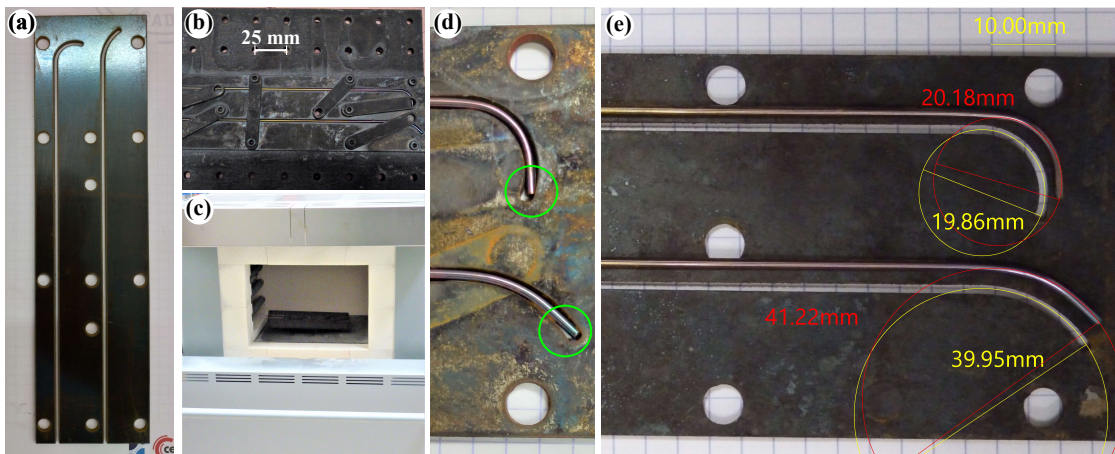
Nitinol tubes shape-setting. (a) Creating the grooves of the desired curvatures (10 mm and 20 mm radius) on the template utilizing a ProtoMAX water jet cutter machine (from OMAX company, France). (b) Inserting the tube into the fixtures (template and support). (c) Putting the fixtures and the tubes in the air furnace at 600°C for 20 min. (d) The obtained result after quenching in cold water. (e) The final result after cleaning.
